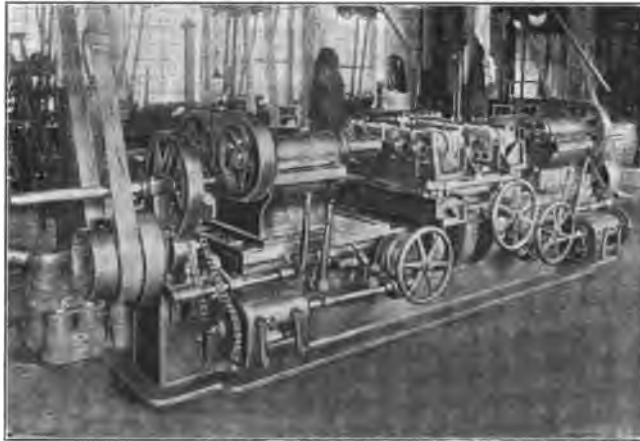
Four-cylinder Boring Machine with Revolving Table
